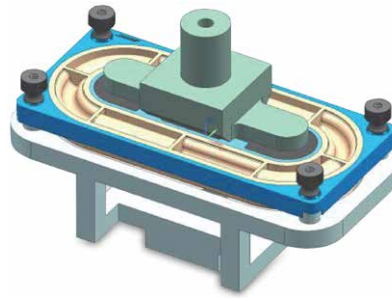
Custom test fixture used for QA testing of Bose® passive radiator materials used in SoundLink® and SoundLink Mini portable Bluetooth® speaker products on Bose ElectroForce® 3220 test instrument.
